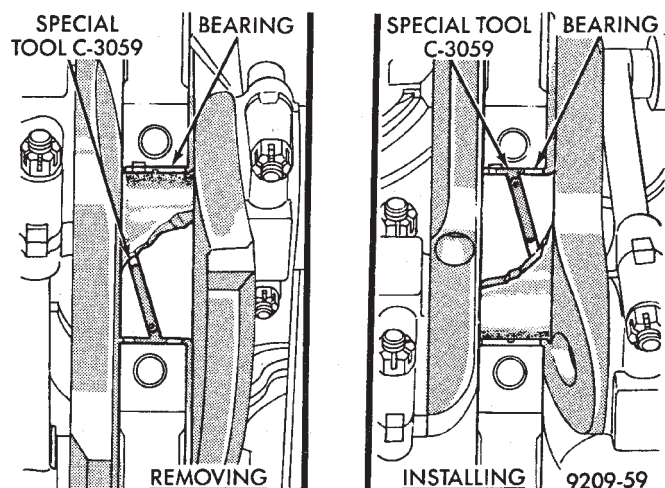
Upper Main Bearing Removal and Installation with Tool C-3059
